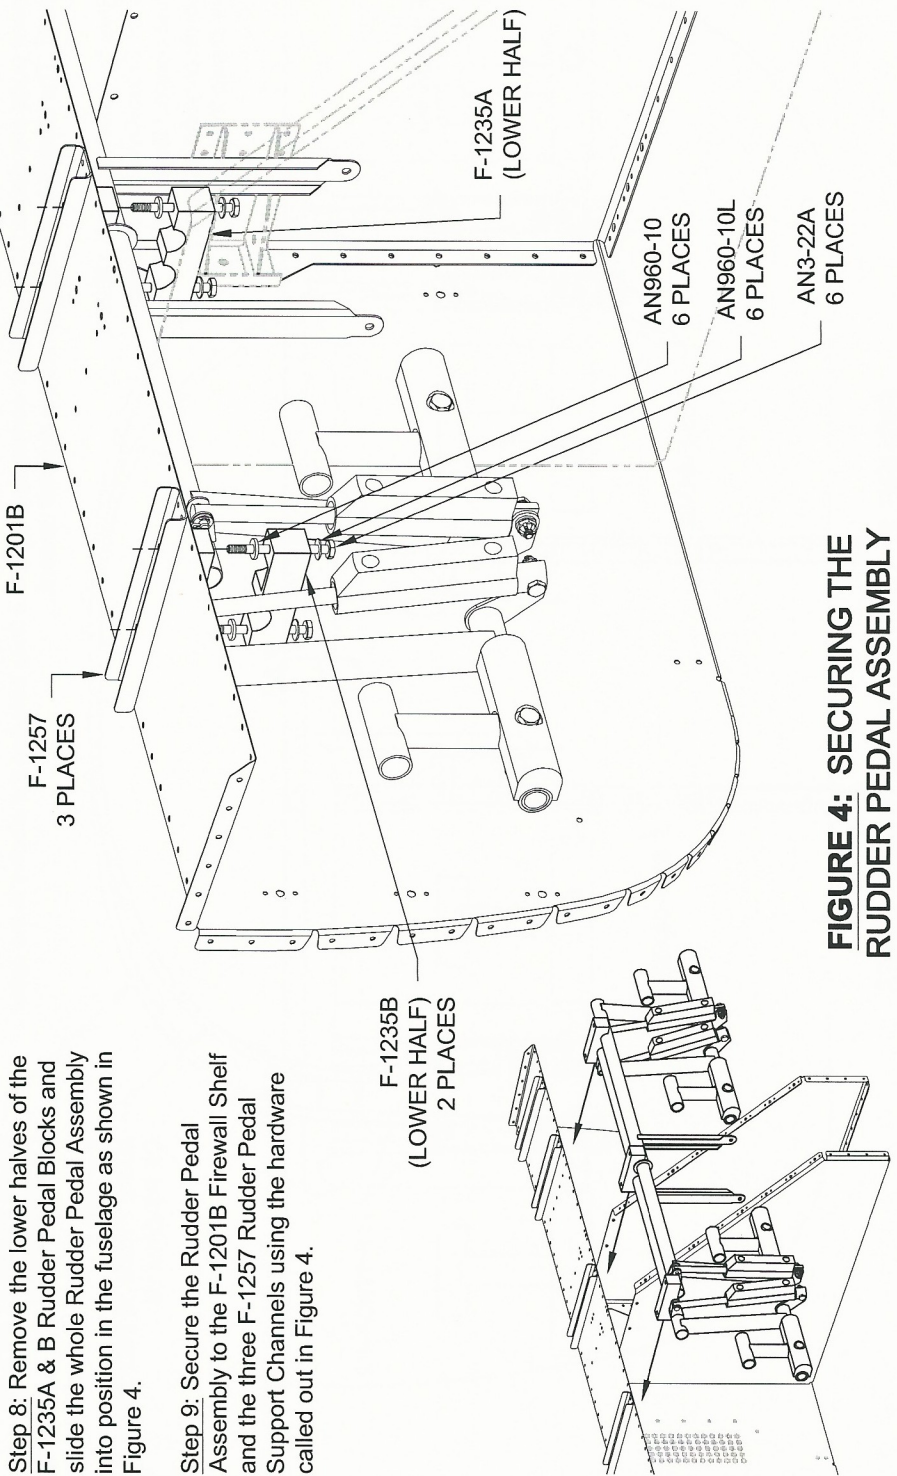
SECURING THE RUDDER PEDAL ASSEMBLY
